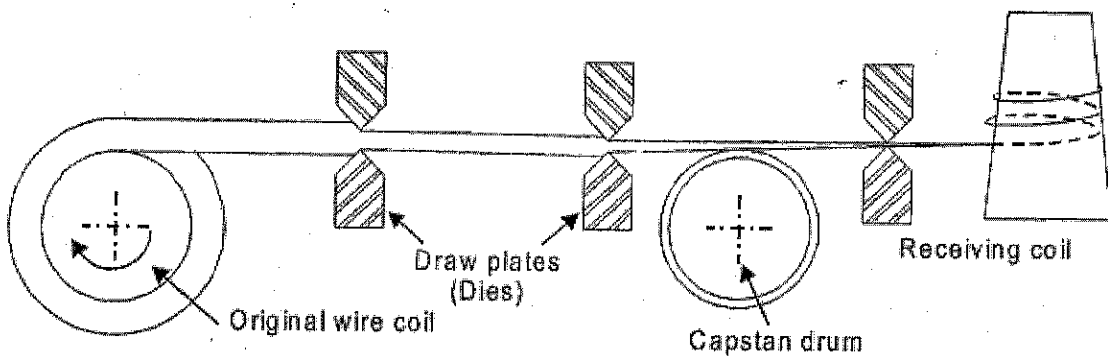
Schematics for wire drawing (Singh, 2006)
